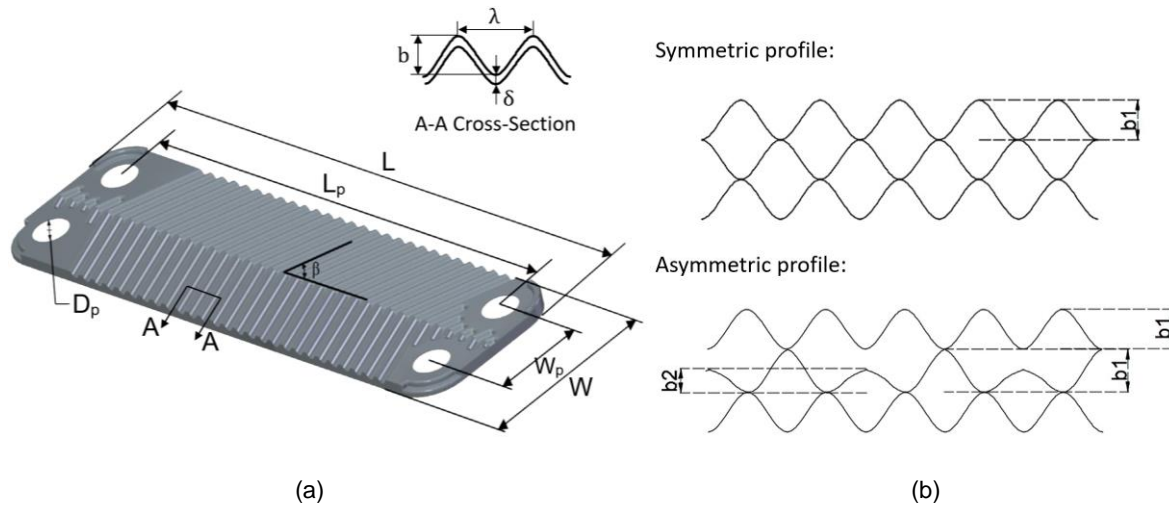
Drawing of the chevron plate prototype and the related geometrical parameters
